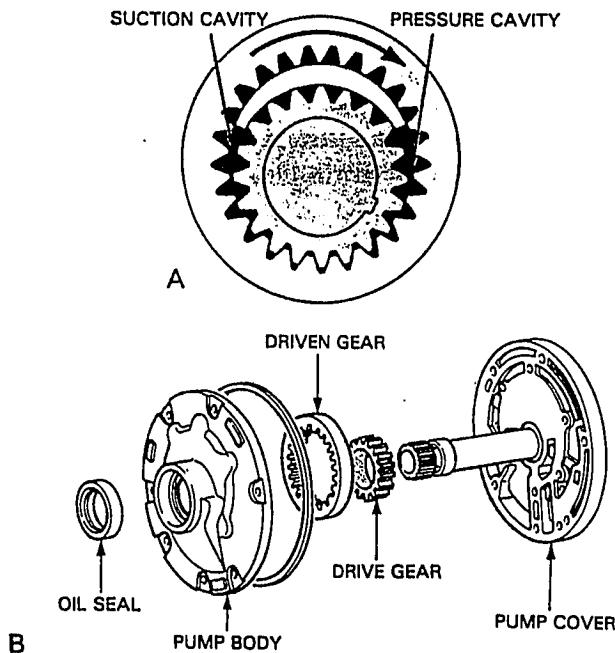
A—Note action in transmission internal-external gear oil pump. B—Exploded view of gear type oil pump. (Toyota)
